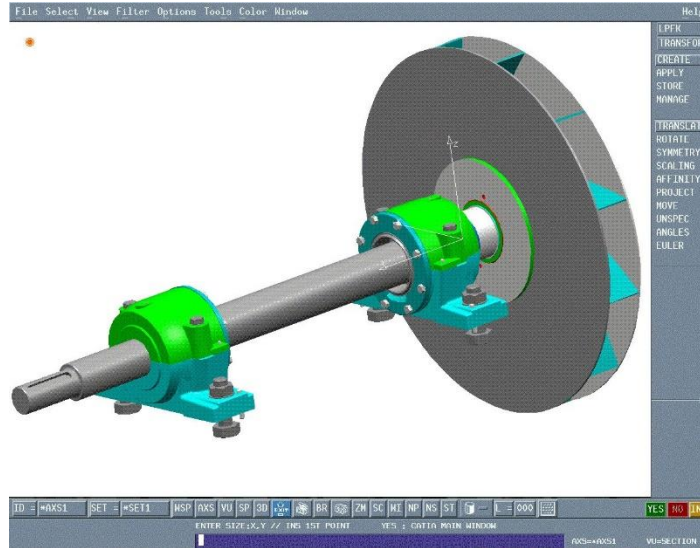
CAD model of the offset rotor shaft of centrifugal fan
